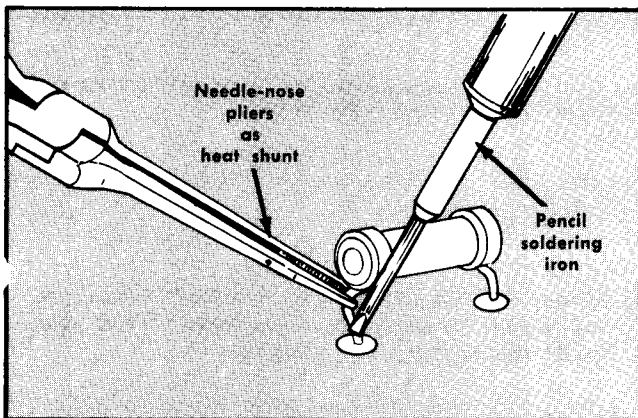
Apply the soldering iron to the heat-shunted lead when removing a component from an etched-wiring card.
